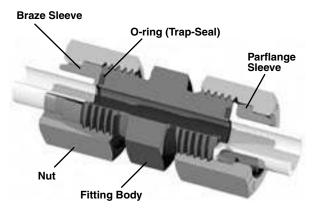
Seal-Lok Union cutaway with flanged and brazed assemblies
